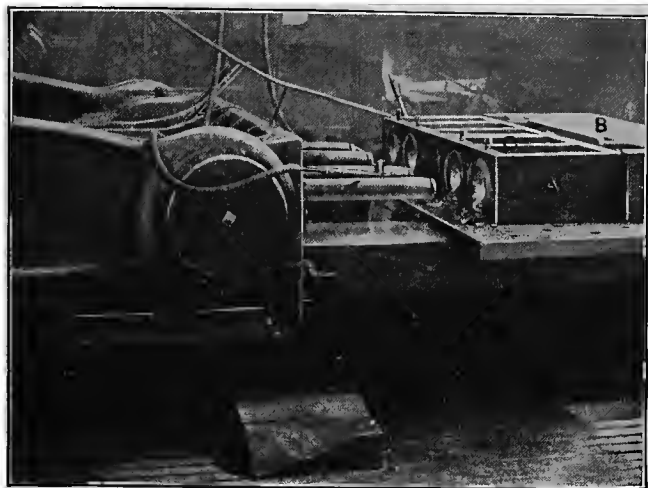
FIRST AND SECOND DRAWING OPERATIONS
